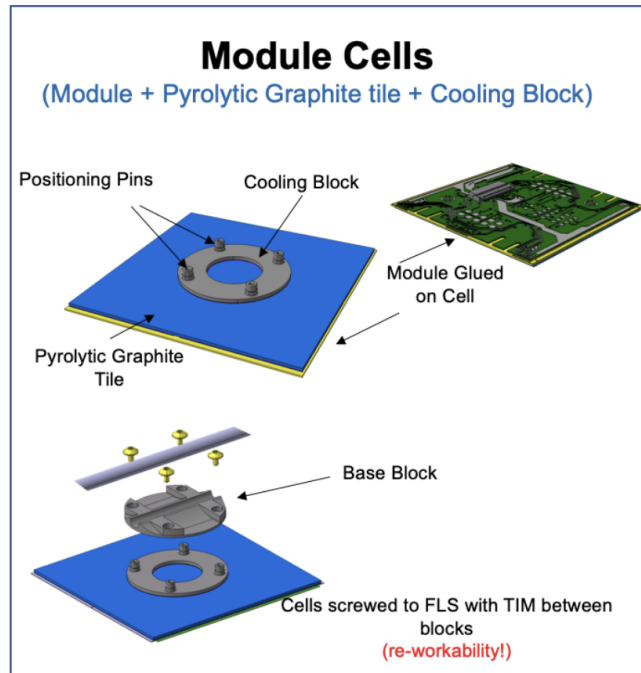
Expanded view of the Modules in the outer barrel [57]
